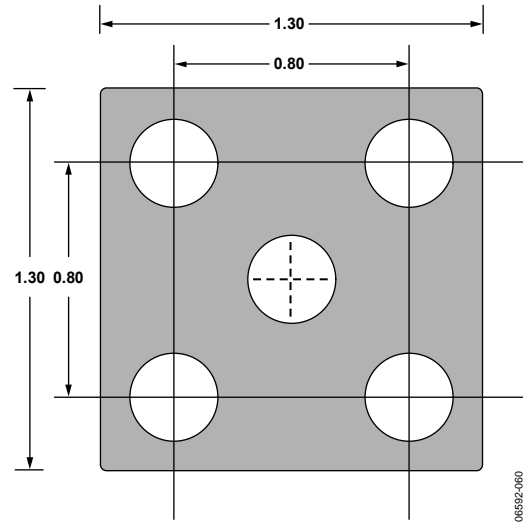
Recommended PCB Thermal Attach Pad (ADA4938-1) (Dimensions in mm)
